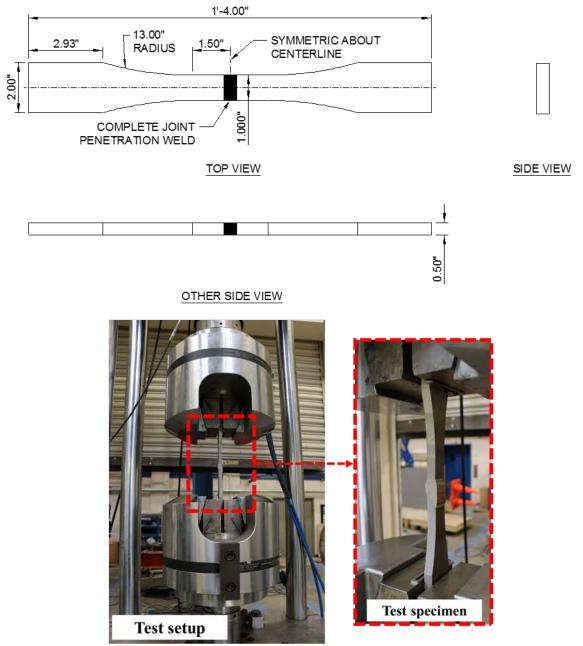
Geometry and Fatigue Test Setup of ASTM A709 Grade 50CR Steel Welded Specimens: top, geometry; bottom, test setup
